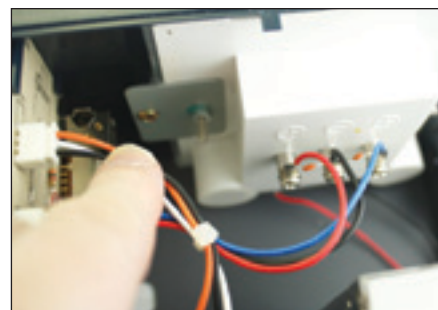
Inside the cabinet, you will have to remove one Phillips screw to remove the meter movement from the case.
